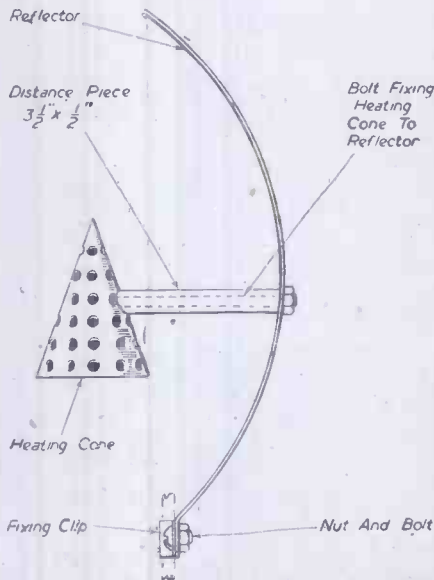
Side view of reflector, showing method of attaching heating cone and fixing clips.
